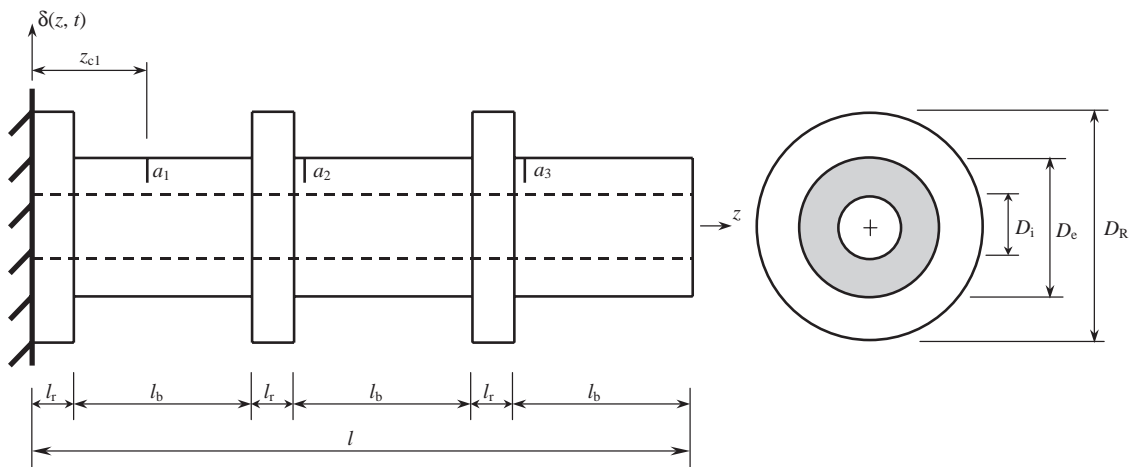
A circular-hollow-sectional cantilever beam having three stiffening rings and three open cracks.
